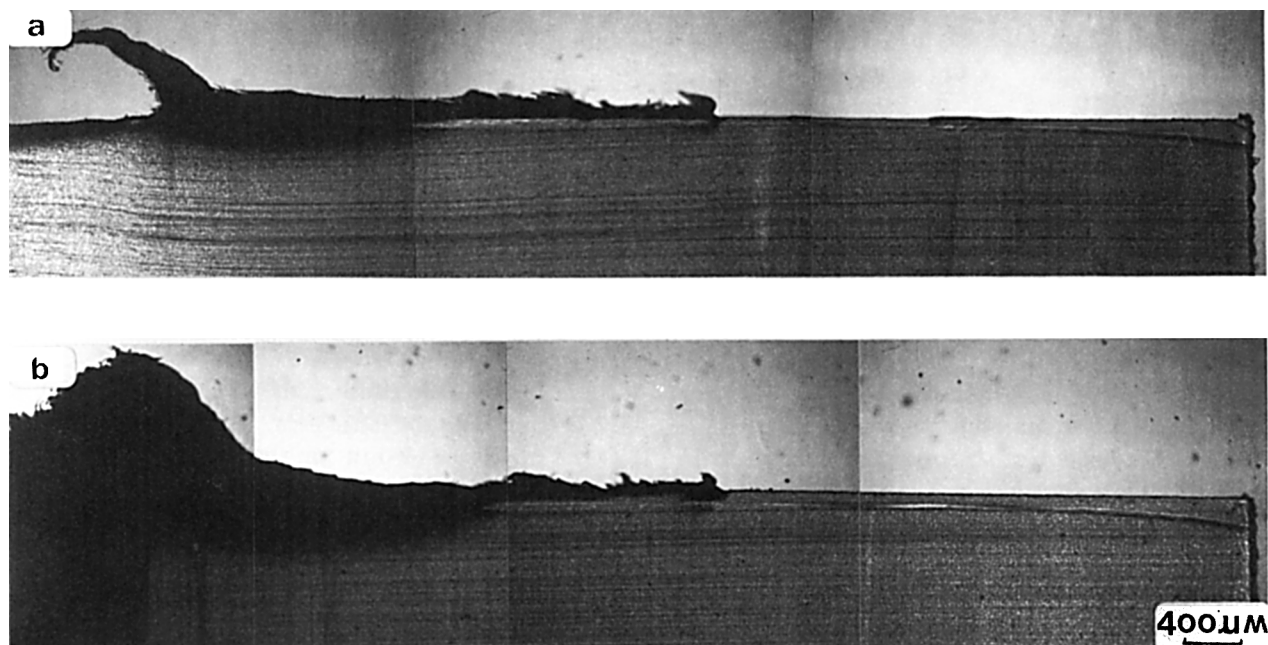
Side view of the fractured specimen welded at a pressure of 1.6 MPa and with a lifetime of 3550 min; (a) and (b) were sliced at different locations along specimen width direction. Fracture is shown in the center of the molten zone.
